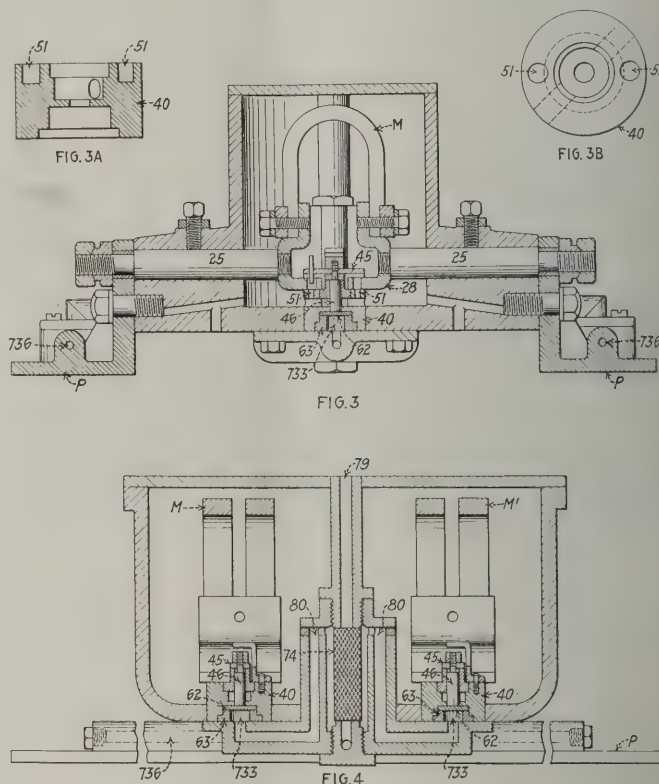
and 4—Cross-Section on Magnet Control Valve Unit
